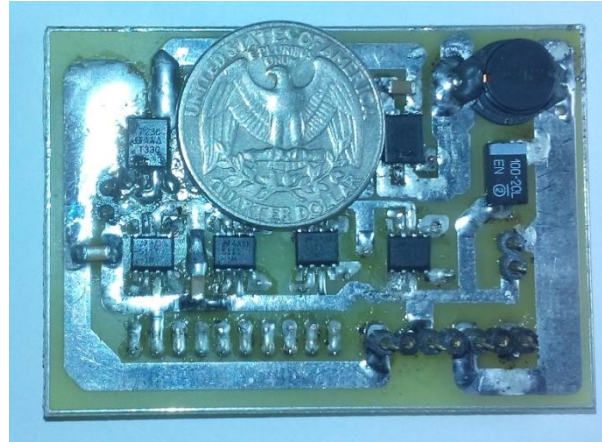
Completed Printed Circuit Board #4 with US quarter dollar for scale.
